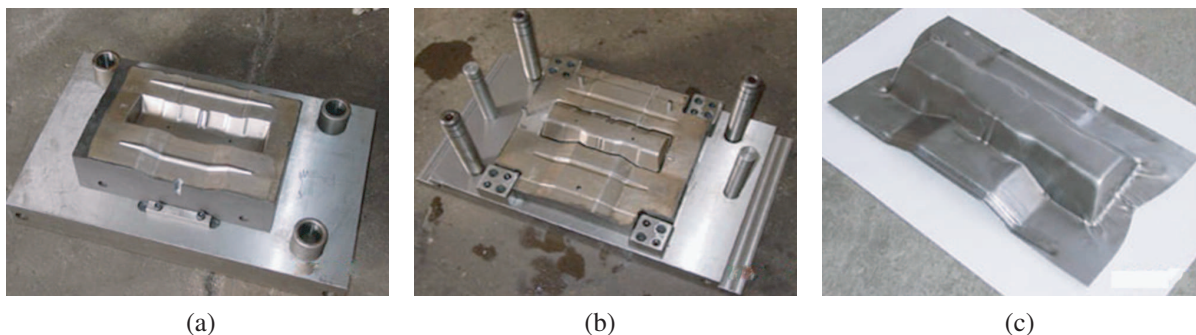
(a) Concave mould, (b) protruding mould assembling chart and (c) the product of the car panel.
